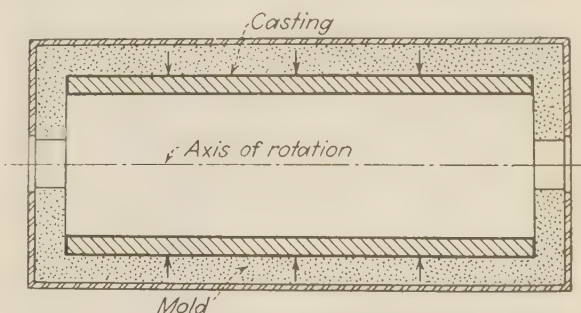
CYLINDRICAL FLASK LINED WITH SAND
